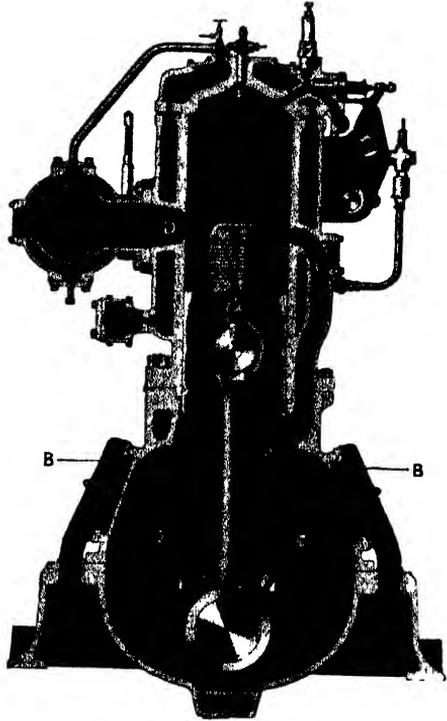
The Gardner J-type Heavy-oil Marine Engine
